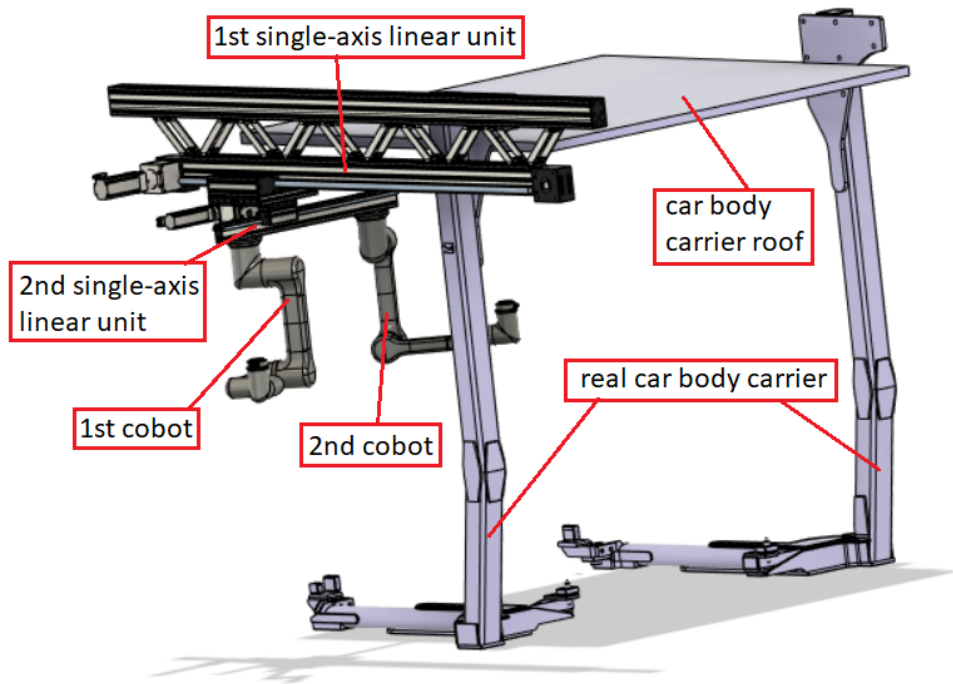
2-axis linear units and 2 cobots with real car body carrier
